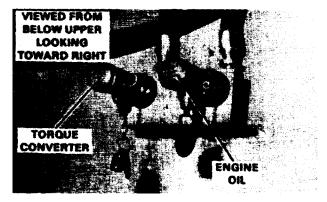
D-2. Engine and Torque Converter Oil Sample Valves
